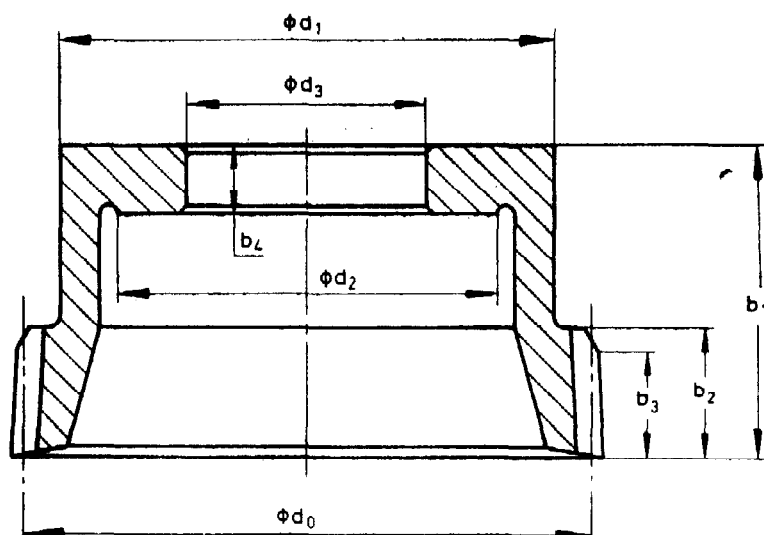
DIMENSIONS FOR HUB TYPE GEAR SHAPER CUTTER
